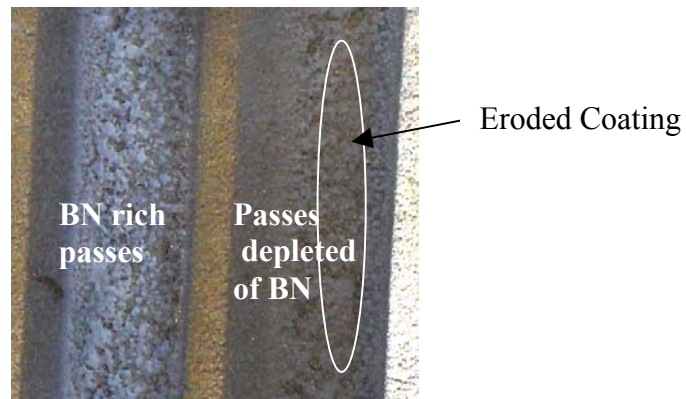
Ni + 2wt% hBN coating using milled feedstock
